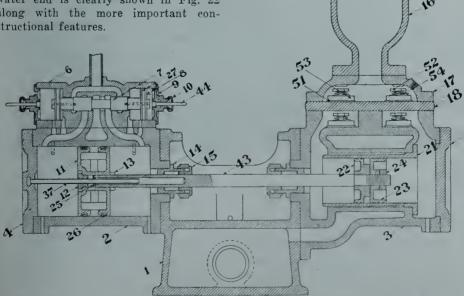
SECTIONAL VIEW OF "GOLDIE & McCULLOCH" SIMPLEX PISTON TYPE BOILER FEED PUMP.
